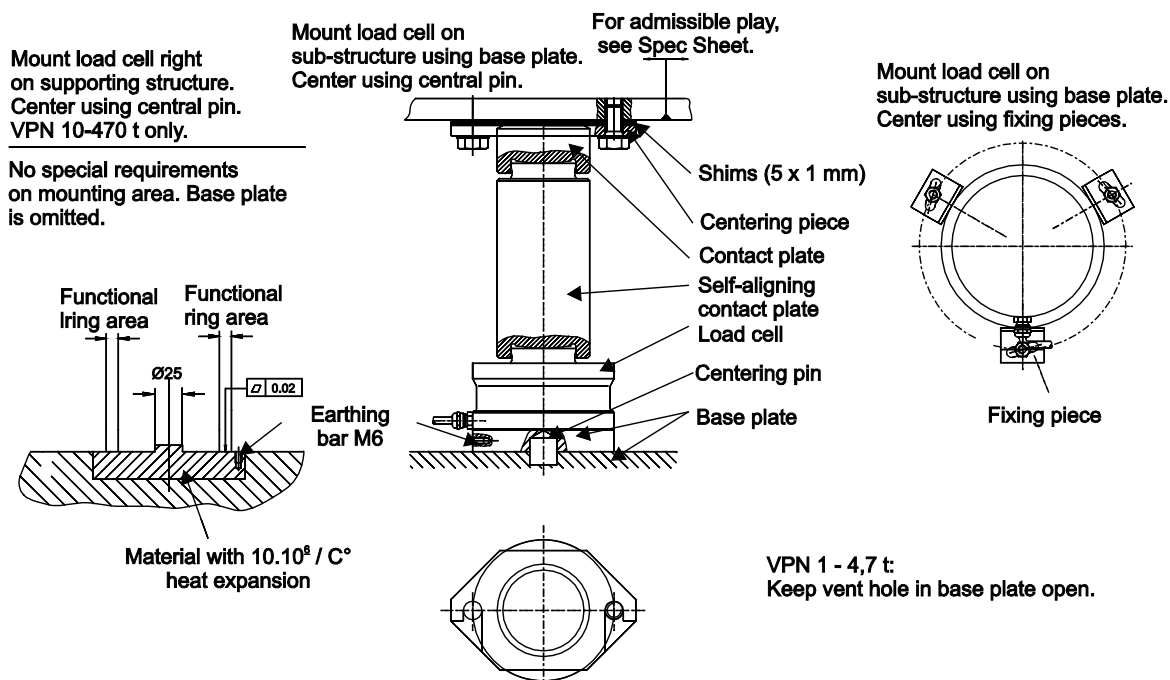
Installation drawing for the bearing VPN 1 t ... 470 t
